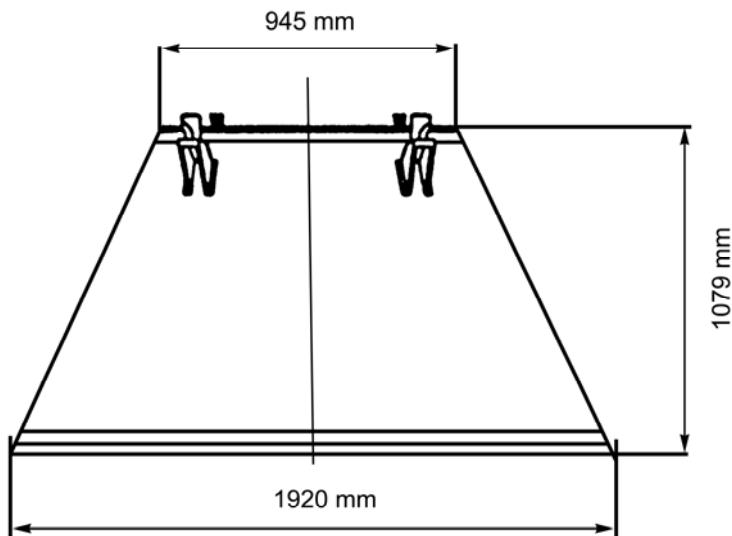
Case study: Ariane 4 payload adapter - overall view of adapter 937B
